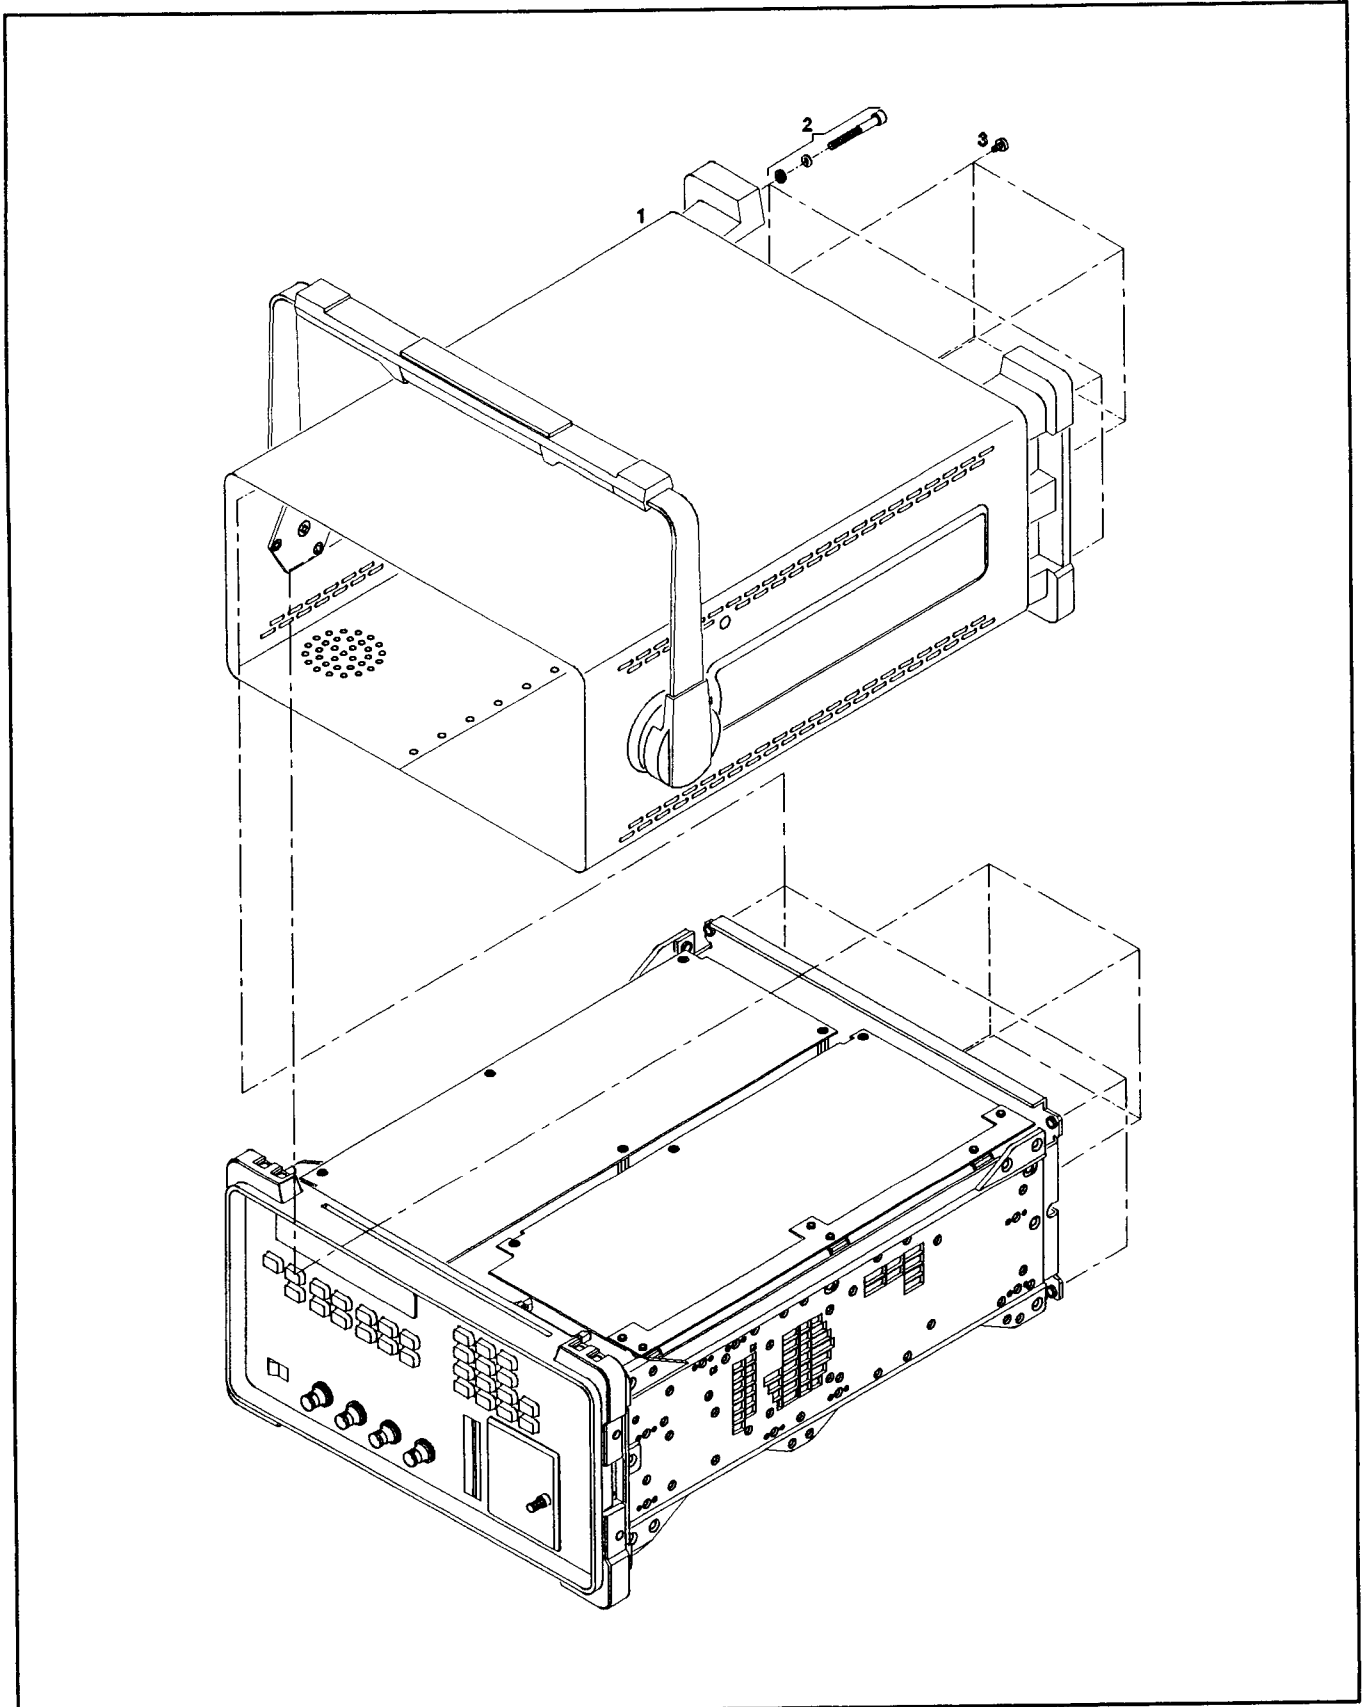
Cabinet Parts Illustrated Parts Breakdown
